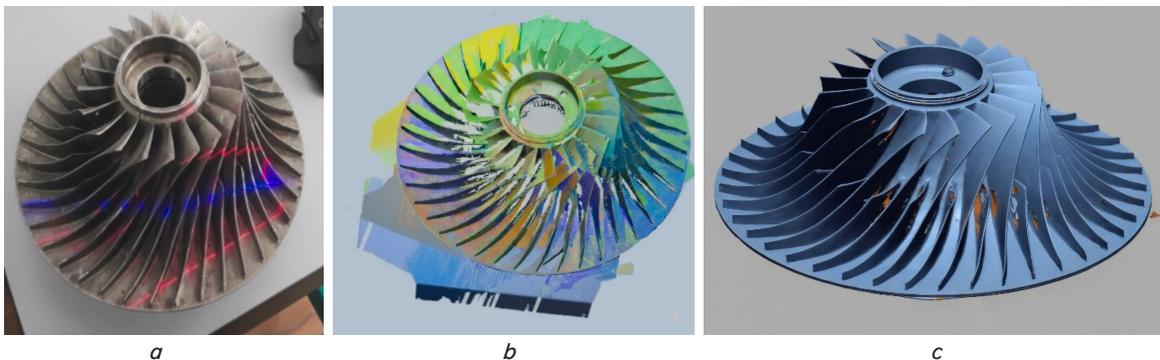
Constructing a single portrait of the impeller: a – 3D scanning; b – grouping of portraits; c – polygonal model of the impeller "*.STL"
